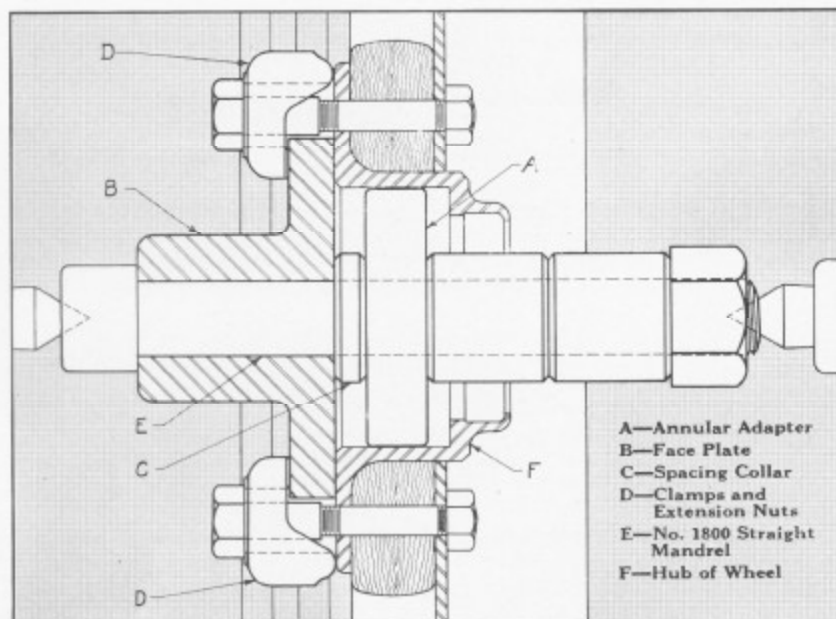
Rear Wheel Fitted with Annular Ball Bearings Mounted on a Self-Centering Mandrel, Face Plate and Annular Adapter
